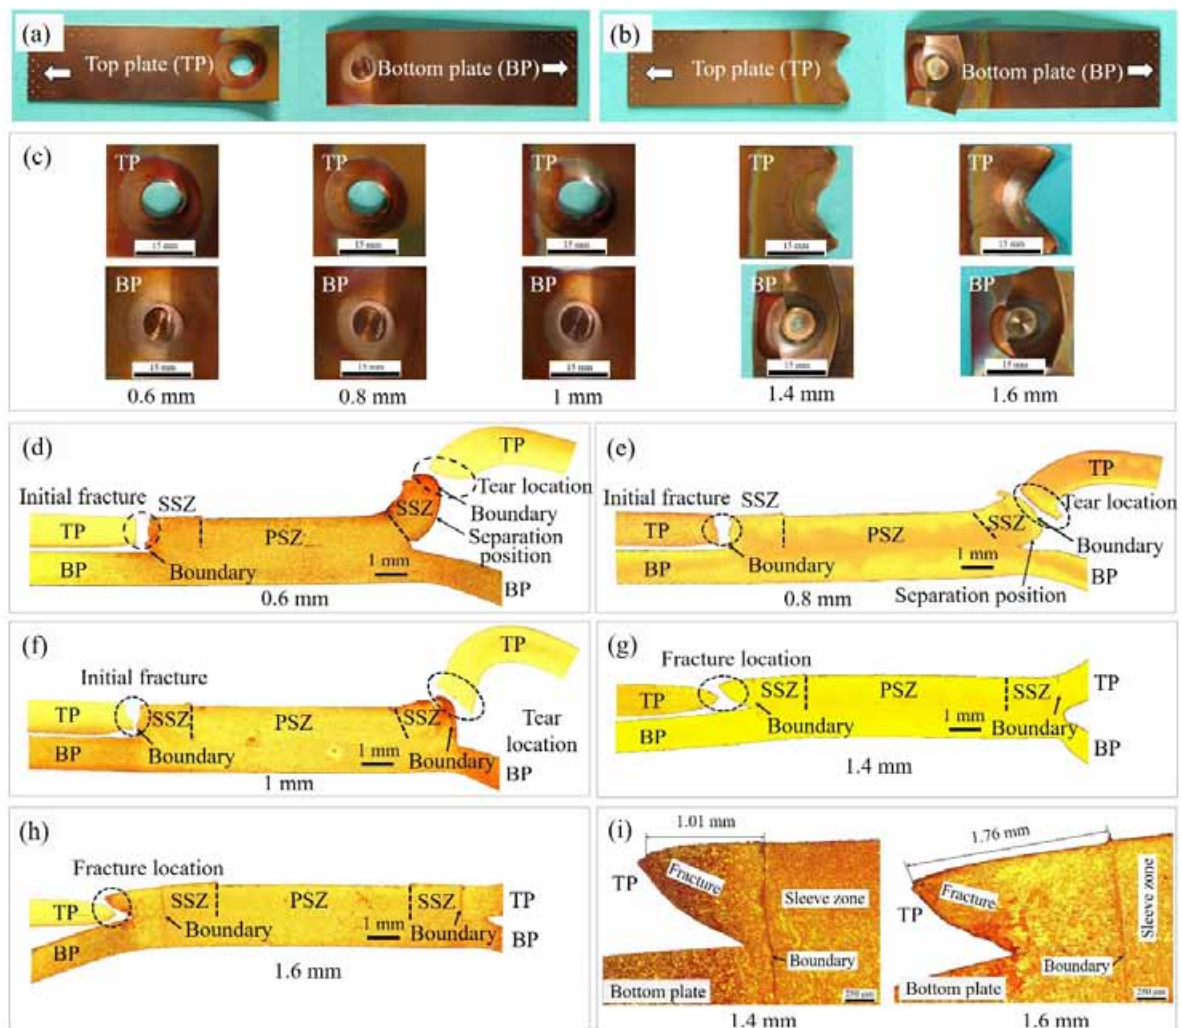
Failure modes of welding workpieces under different plunge depths: (a) Failure mode under 0.8 mm plunge depth; (b) Failure mode under 1.4 mm plunge depth; (c) Fracture images of welding workpieces under different plunge depths; (d-h) Cross-sectional morphologies of the fractured workpieces under different plunge depths; (i) Enlarged views of the fracture location under plunge depths of 1.4 mm and 1.6 mm
